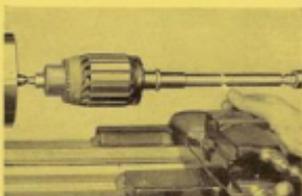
Testing and Straightening a Bent Armature Shaft in the Lathe.
